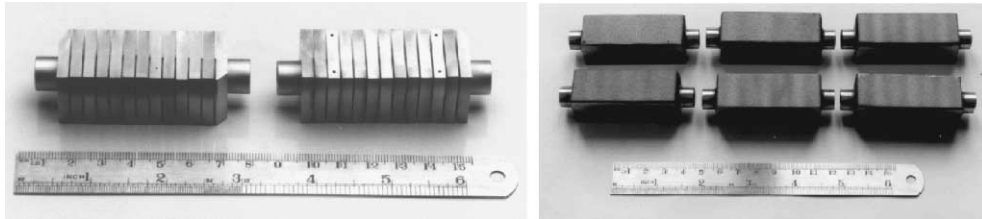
W monoblocks and W plasma spray components manufactured by the EU.
